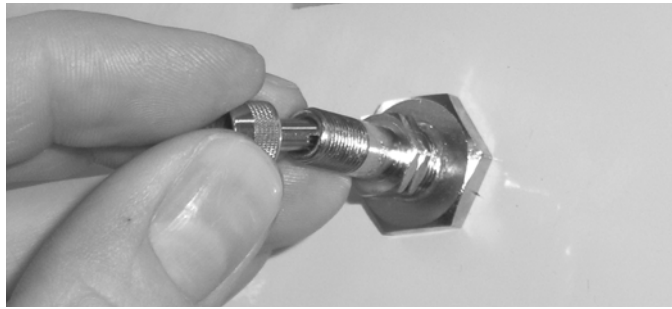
Turn the Bleed Valve Caps around and Press them into the Valve Body.
